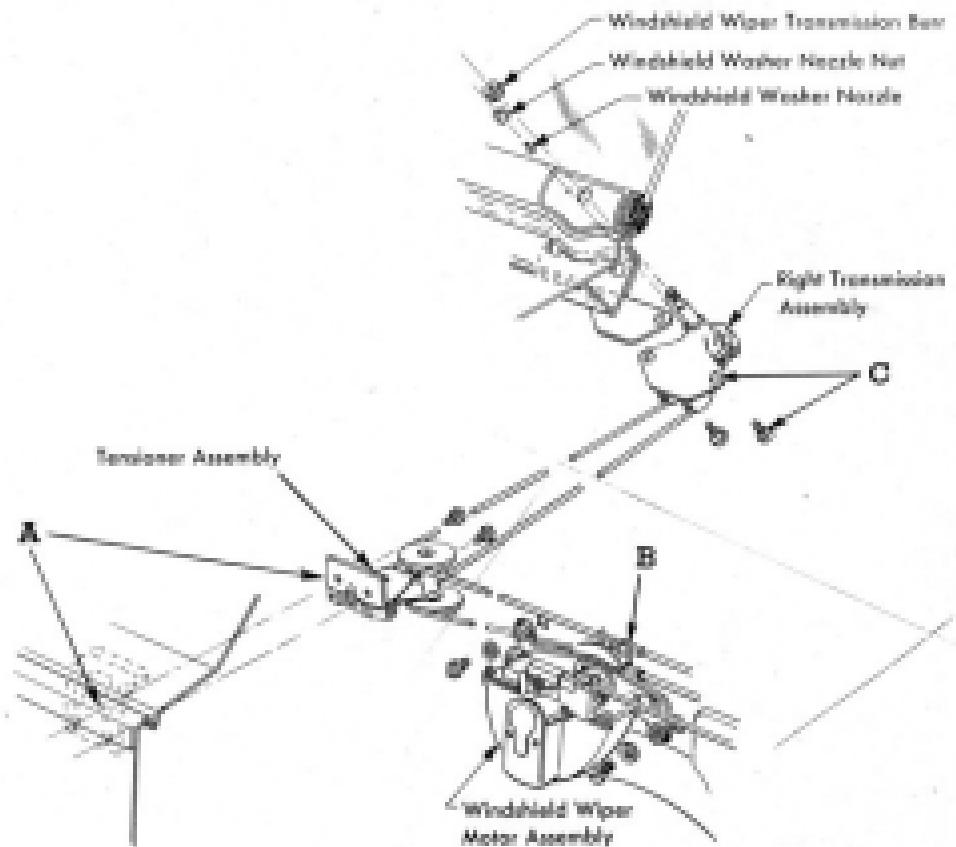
Layout of Windshield Wiper Operating Mechanism
